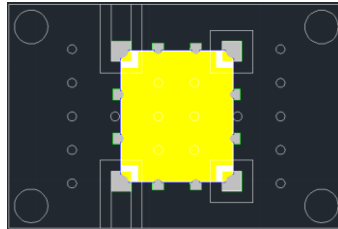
Applying the Solder Paste to the 13 Points on the PCB Surface
